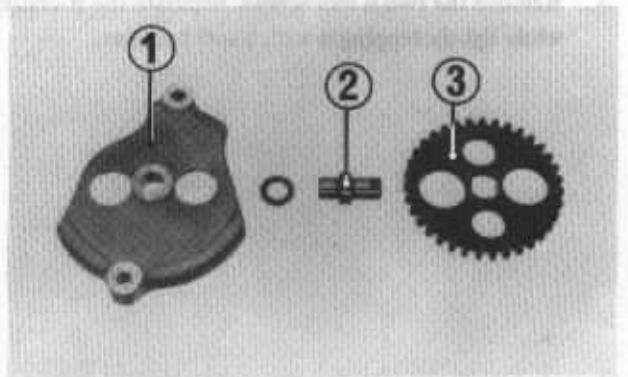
(1) Oil pump gear cover (2) Drive gear shaft (3) Drive gear
